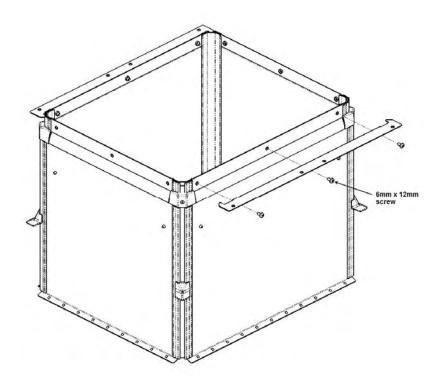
Installing mounting brackets on vertical exhaust duct
